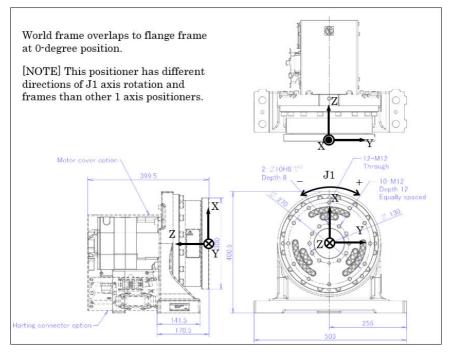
(c) 1000kg/1500kg payload 1-axis positioner (Compact type) world frame and flange frame
